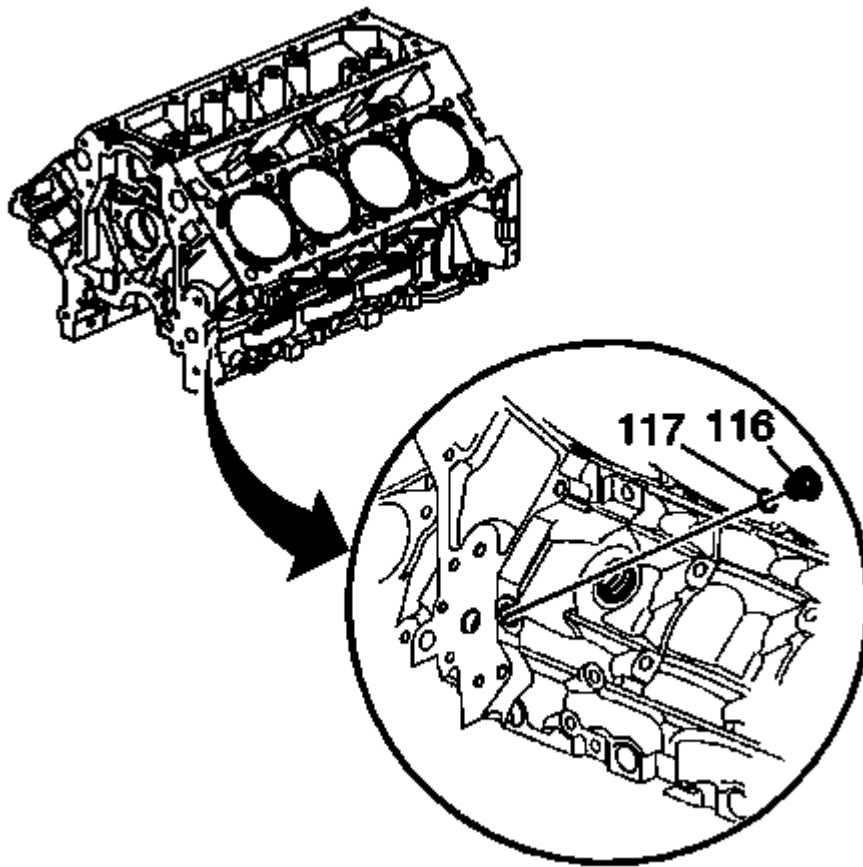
Engine Block Left Front Oil Gallery Plug & Seal
